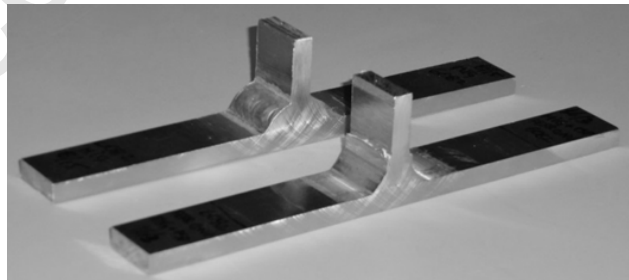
Surface appearance of an unprocessed and processed weld on AA 5083-H111 (tool D).
